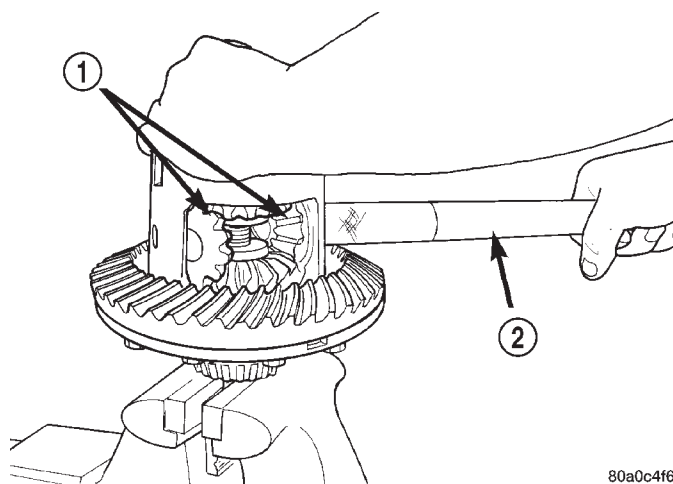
Tighten Belleville Spring Compressor Tool
